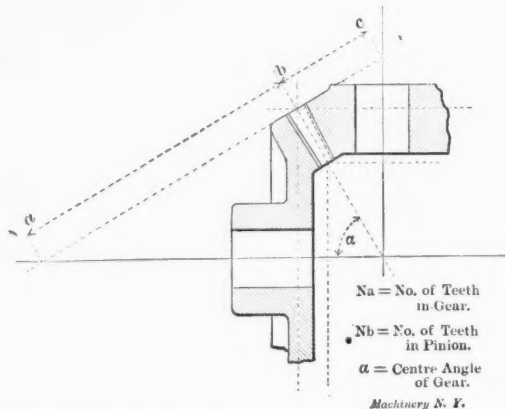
Diagram showing Method of Selecting Cutters for Bevel Gears.
